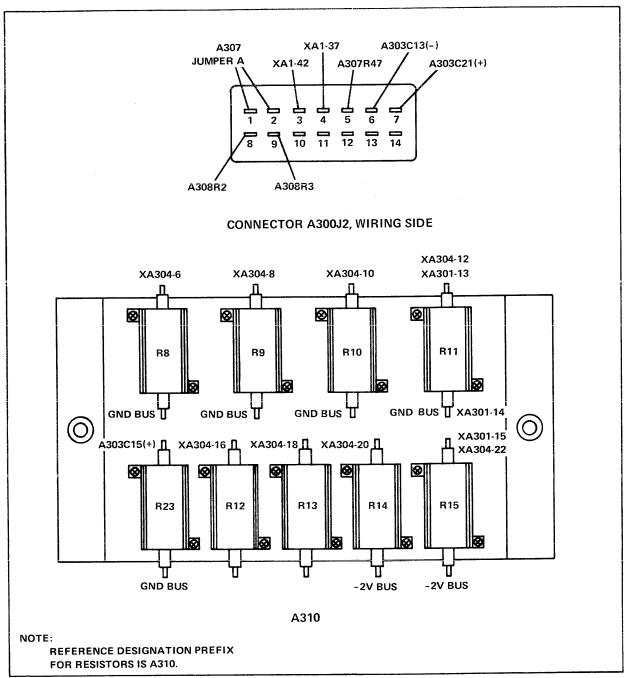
A310 Component Board Assembly and Connector A300J2, Parts Location and Connection Diagram
